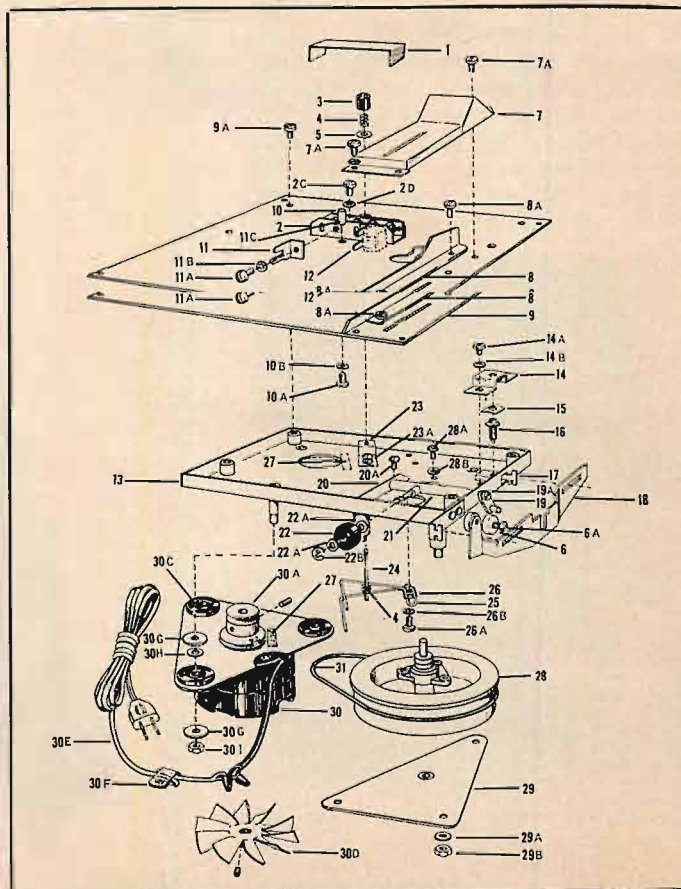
An exploded view of the handler giving parts locations and numbers. (Courtesy of Viking of Minneapolis.)
